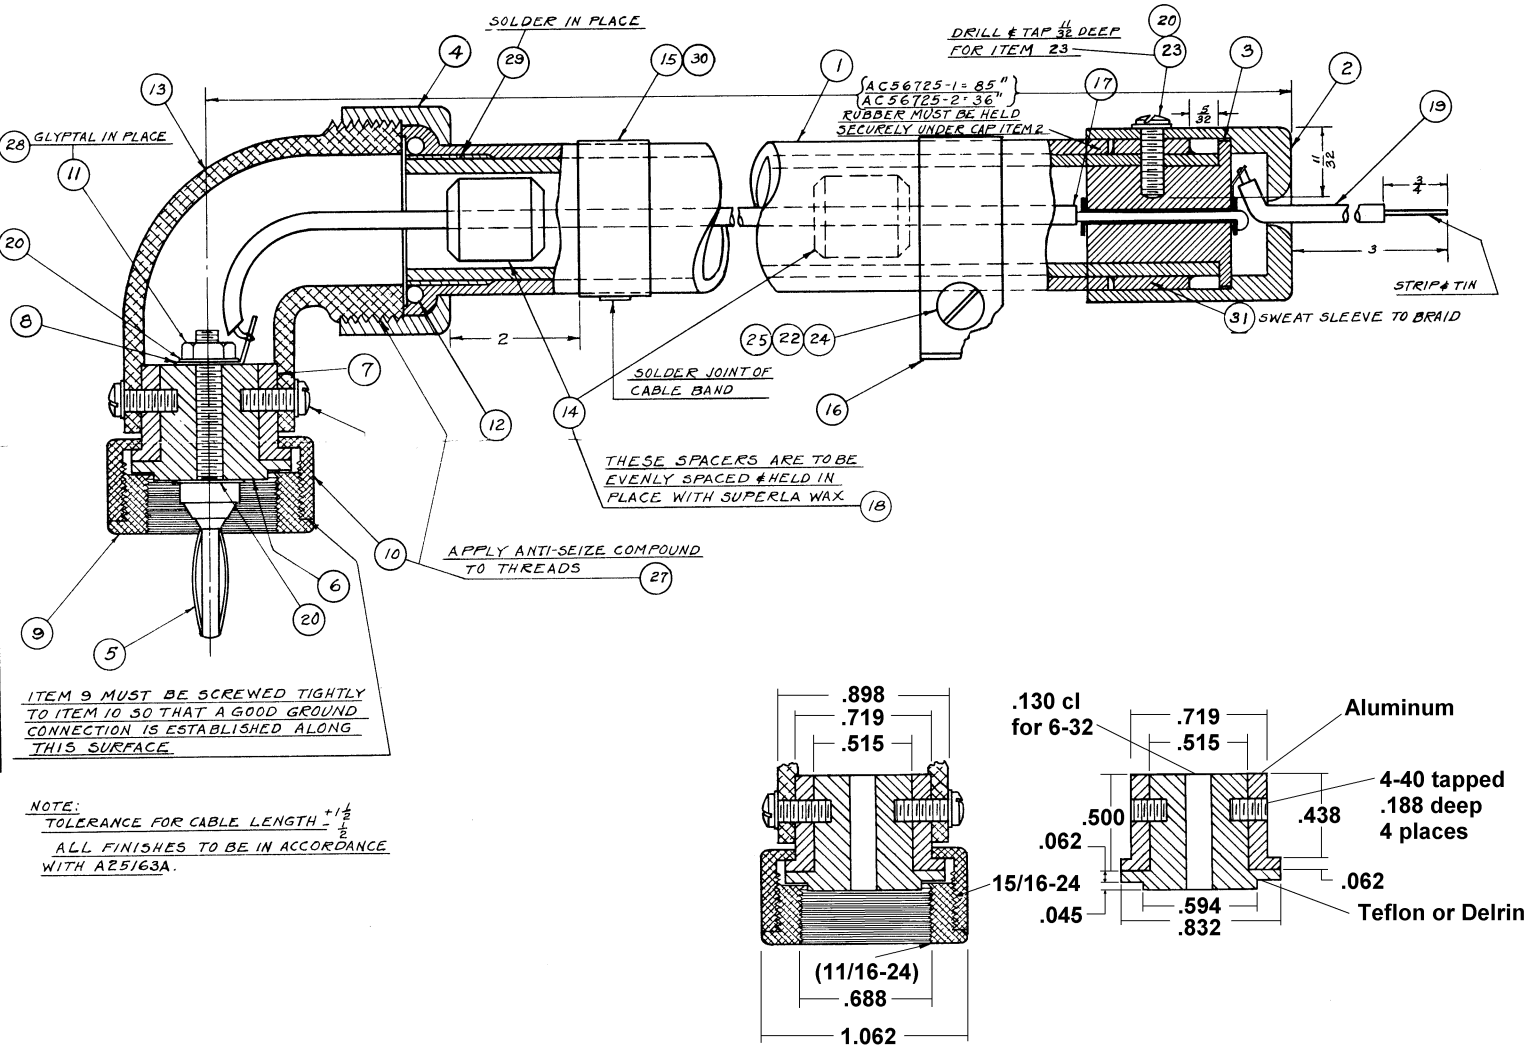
RECEIVER COUPLING CABLE ASSEMBLY
